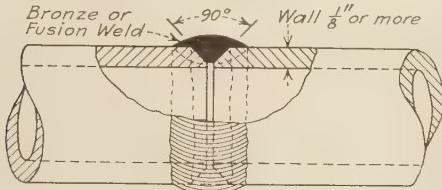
BUTT WELD IN COPPER OR BRASS PIPE
